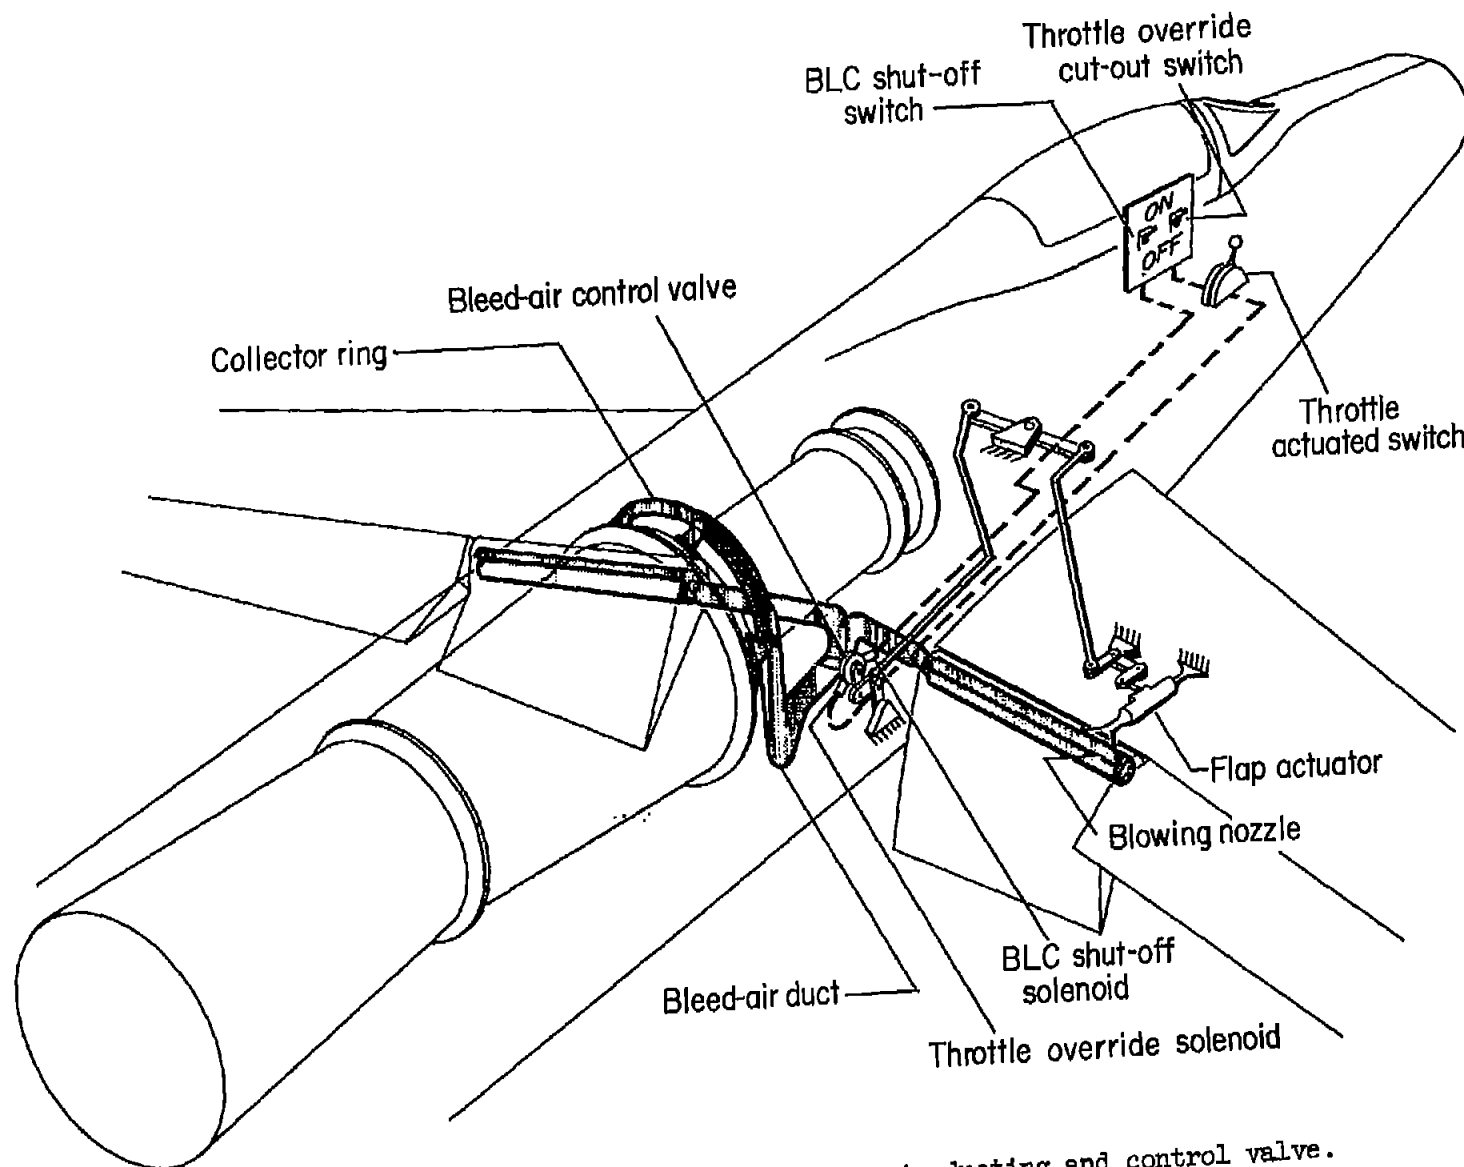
Schematic drawing of bleed-air ducting and control valve.
